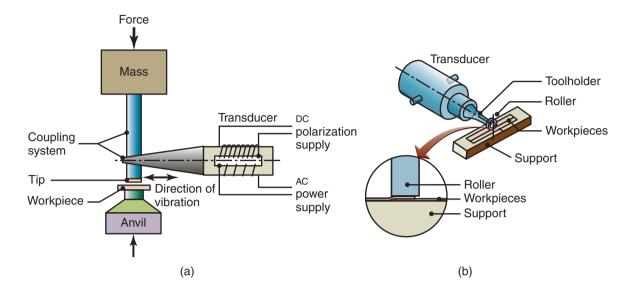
(a) Components of an ultrasonic-welding machine for making lap welds. The lateral vibrations of the tool tip cause plastic deformation and bonding at the interface of the workpieces. (b) Ultrasonic seam welding using a roller as the *sonotrode*.
